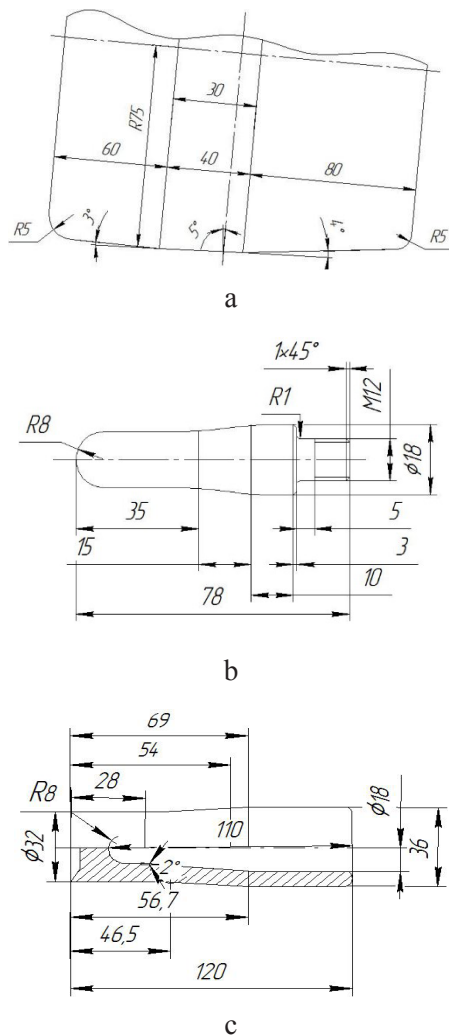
Geometric dimensions: a—rolling rolls, b—sewing mandrel, c—steel vessel at the outlet of the processing line.
